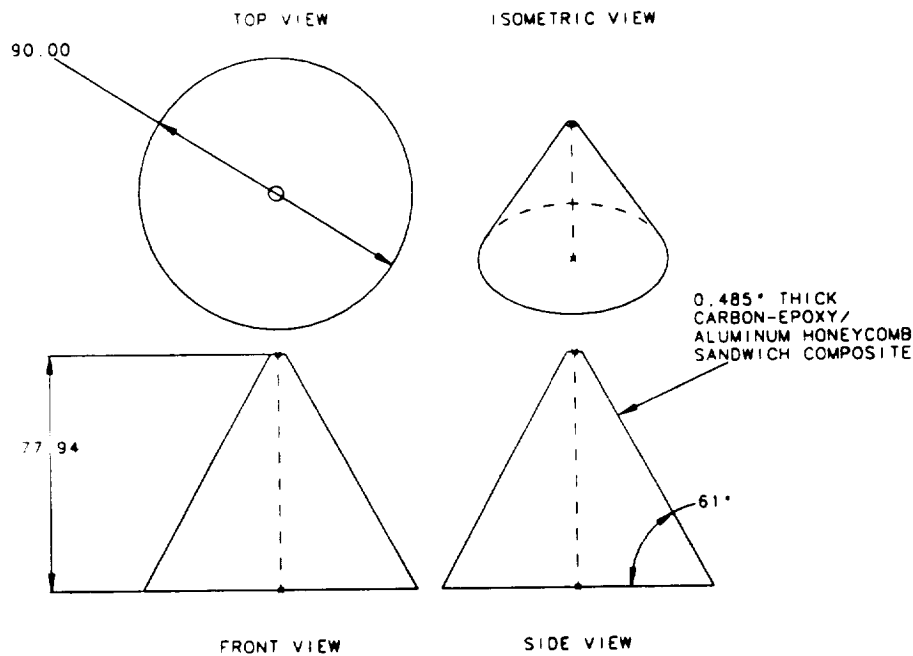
Three-View Drawing of the Solid Booster Fairing
